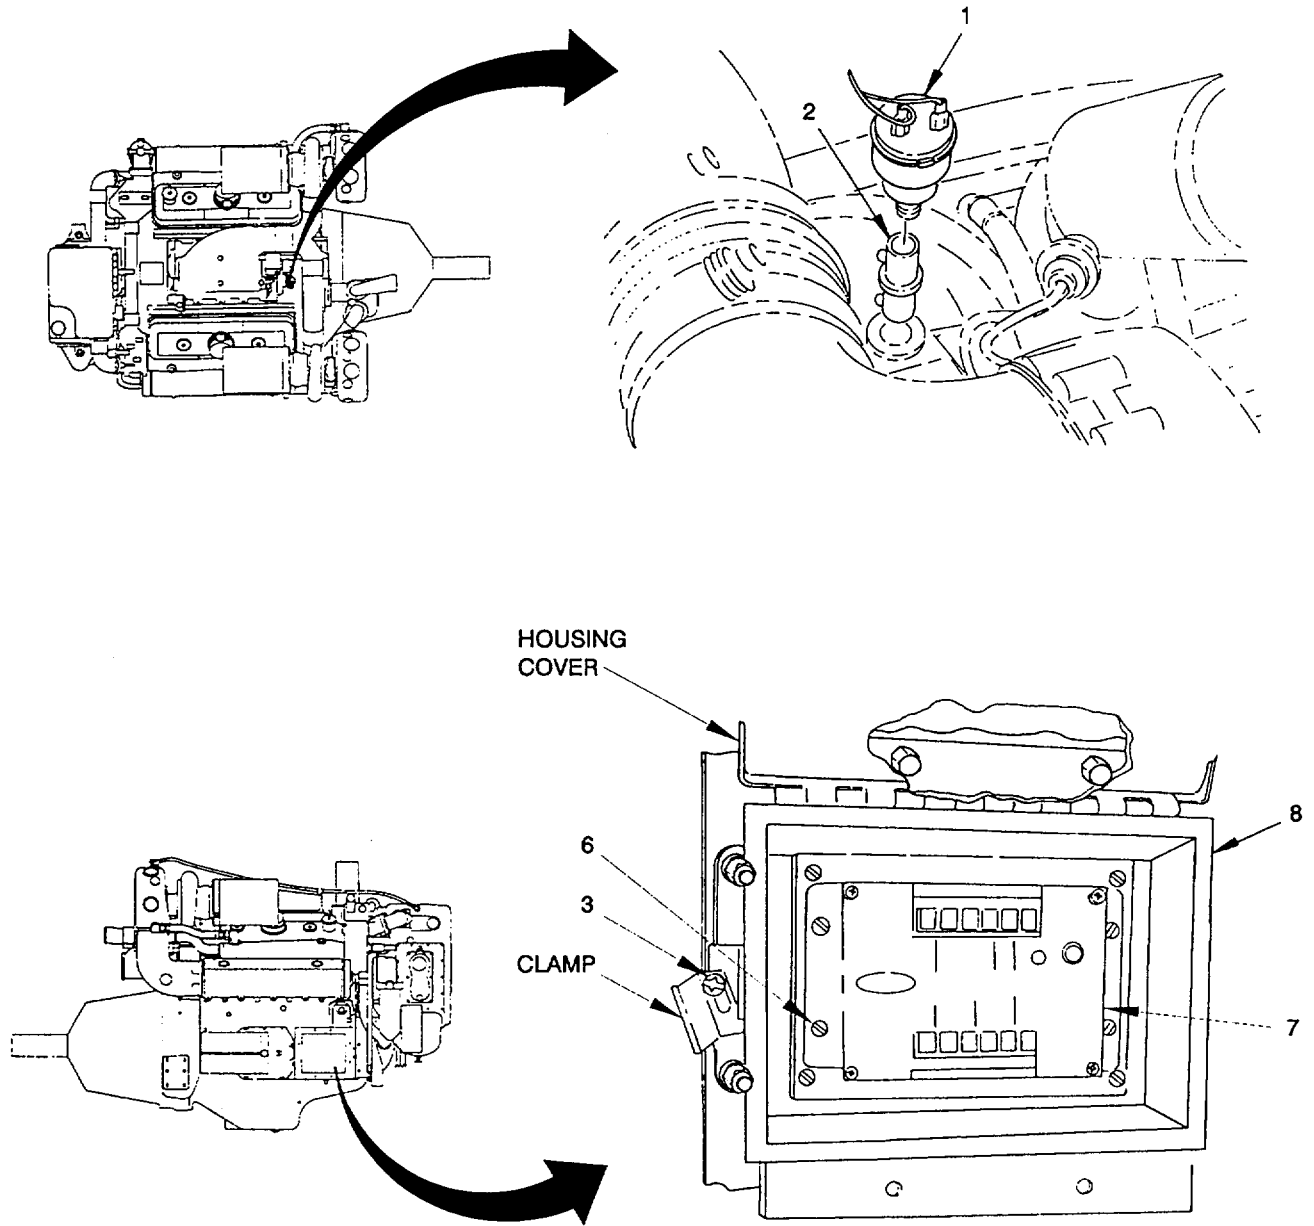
Electronic Governor Controller, Engine Junction Box Assembly "A4", Remove/Install (Sheet 1 of 3).
